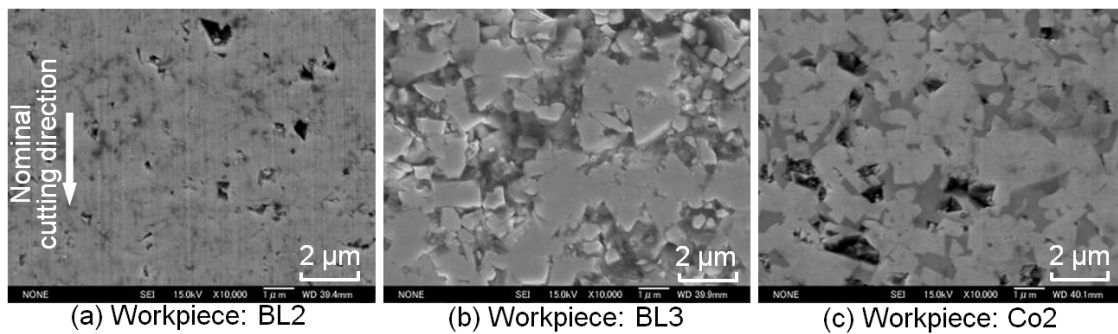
Brittle fracture of machined groove surface (depth of cut: 0.2  $\mu\text{m}$ , vibration amplitudes: 1-0.5  $\mu\text{m}_{0-p}$ , nominal cutting speed: 137.5 mm/min)
